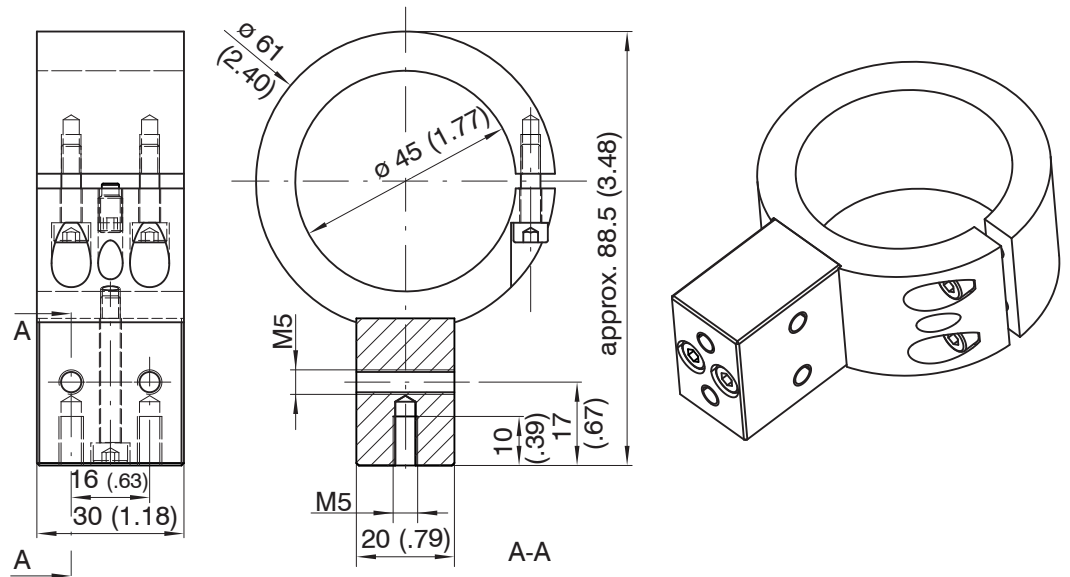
Dimensional drawing mounting adapter, dimensions in mm (inches), not to scale
